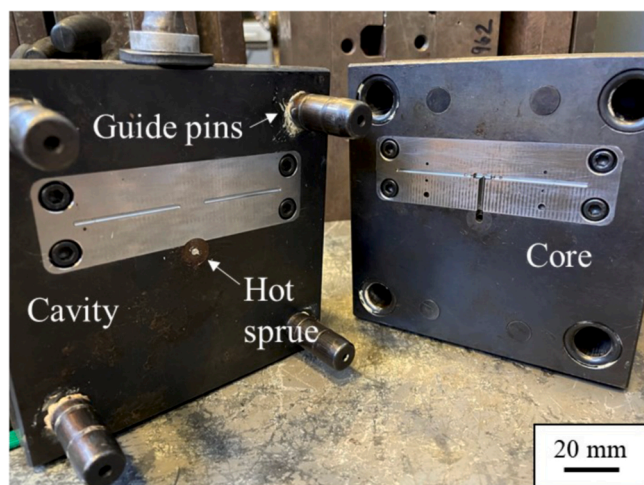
Mold inserts installed in cavity and core plates for injection molding.
